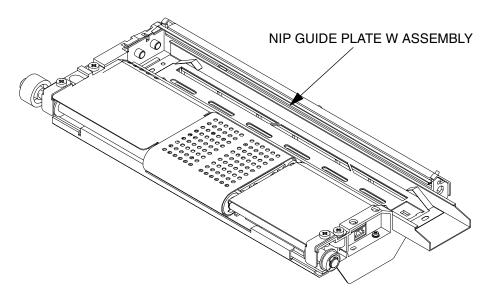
Cleaning of the Nip Guide Plate W Assembly
